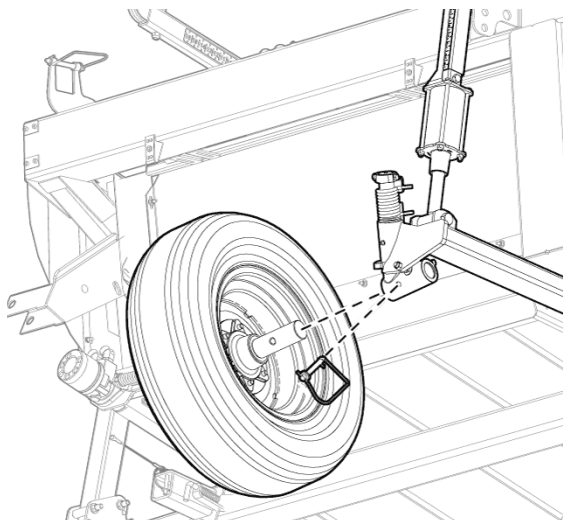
Install Wheels on Gauge Wheel Brackets
